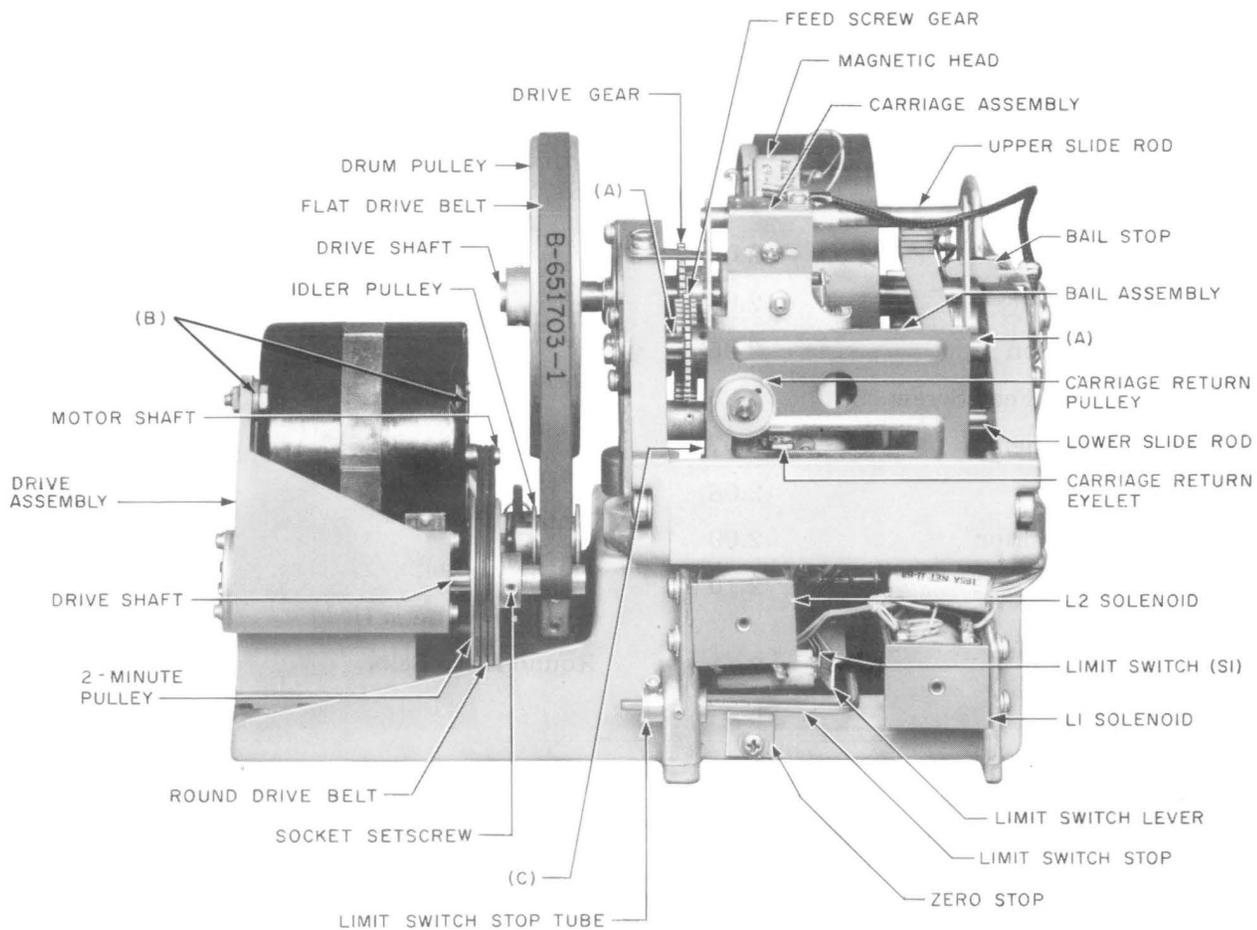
KS-16765 L3 Recorder—Front View (Later Type Shown)
